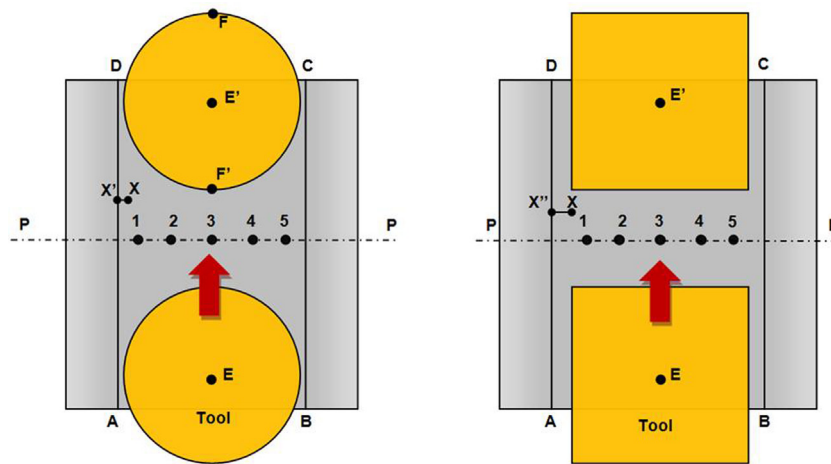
Profile $P-P$ when machining with a cylindrical and rectangular tool.
